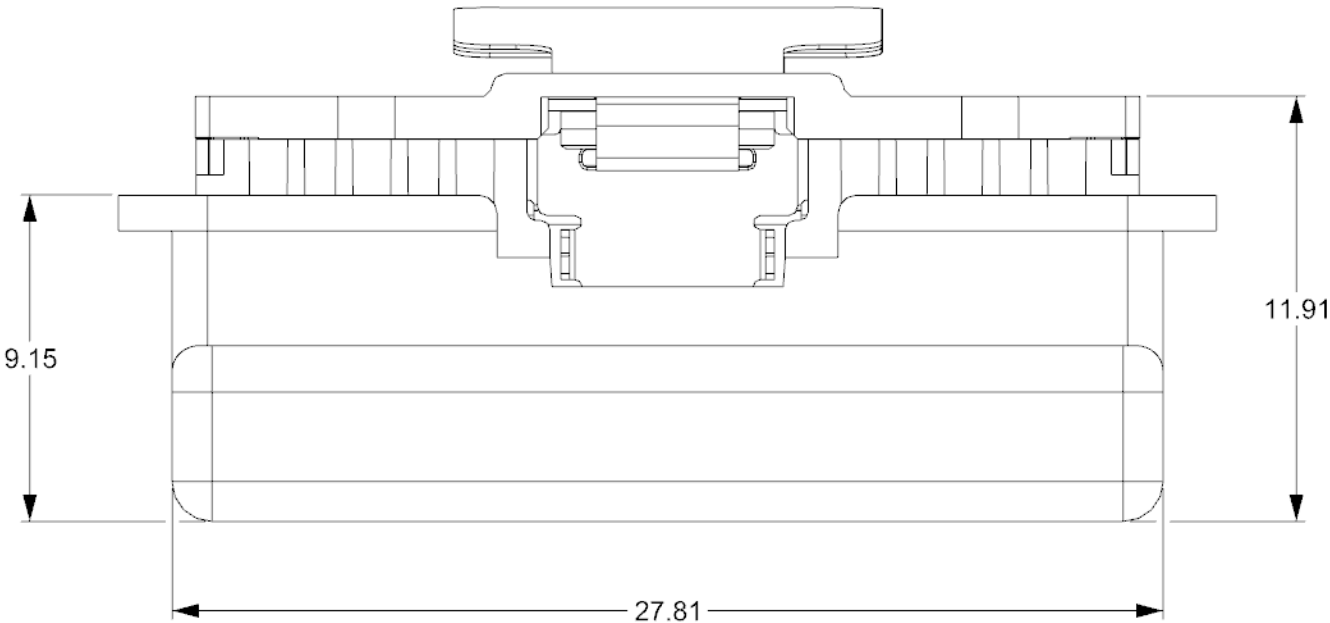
Top View of Free-Side Connector with Dust Cover Attached
